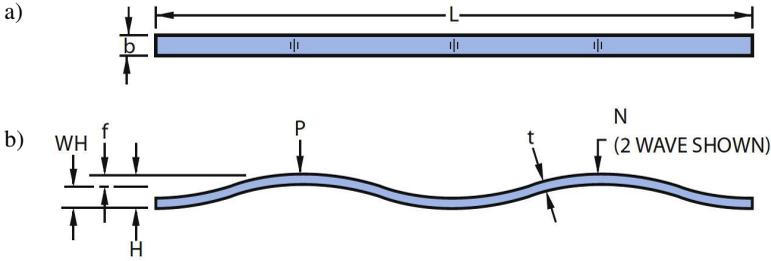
Linear Expander: *a* – Plan; *b* – Side view
